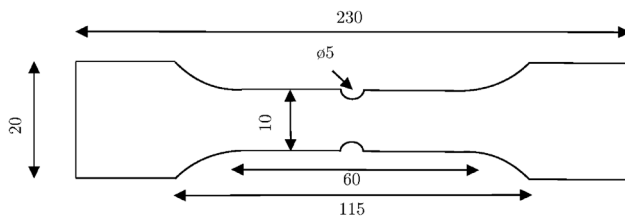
Planar dimensions of the specimen for conditioning and mechanical loading-unloading tests with a thickness of 2.3 mm. All dimensions are in millimeters
